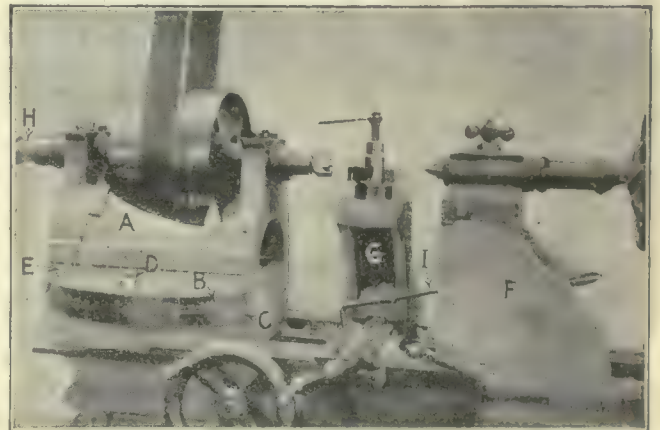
THE OLD ENGINE LATHE NOW A PATTERN LATHE
